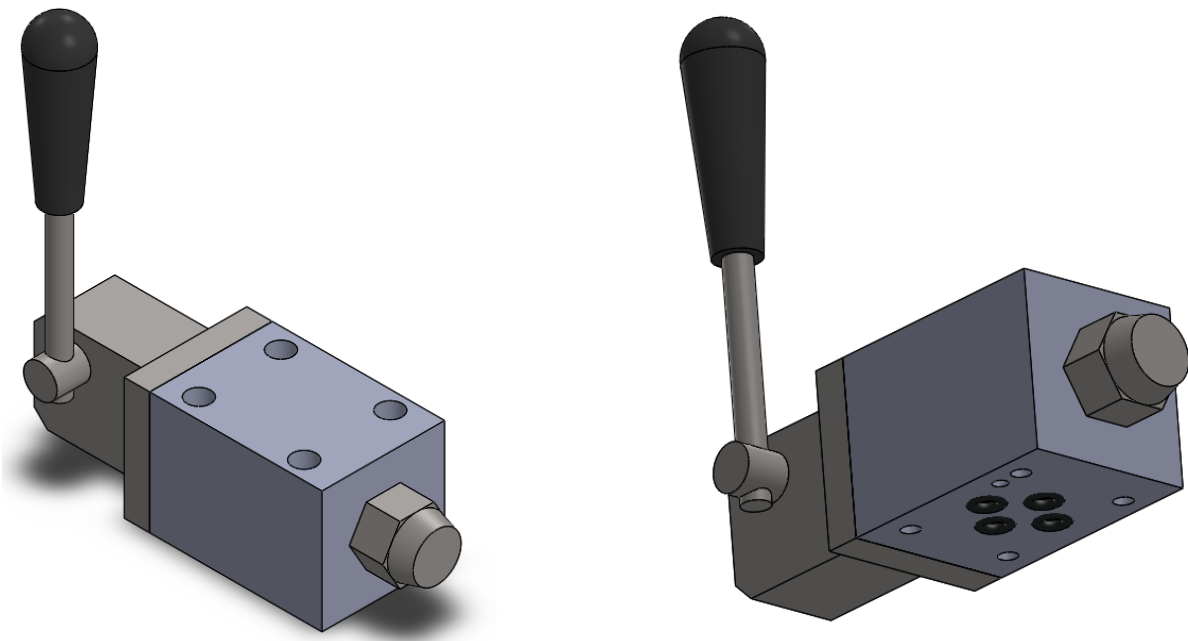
Manual Four-Way Directional Control valve (a) top view (b) bottom view
